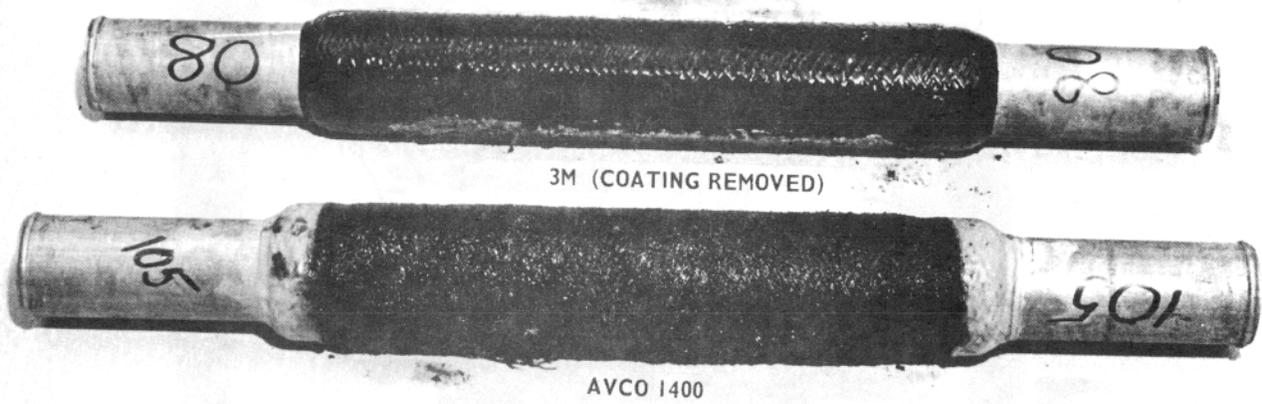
TYPICAL COATED McAIR STANDARD SELF-SEALING FUEL LINES AFTER TEST IN DRY BAY FIXTURE
